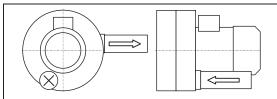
2BH1310 ... 2BH1610, 2BH1910 (two-impeller pump-motor units with a twostage design)
